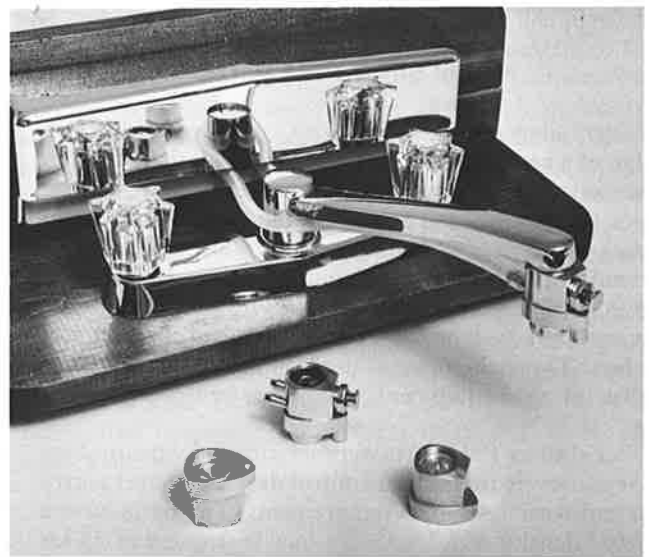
BRASS DIVERTER VALVE BODIES AND ASSEMBLED VALVE FOR WATER PURIFIER UNIT.
